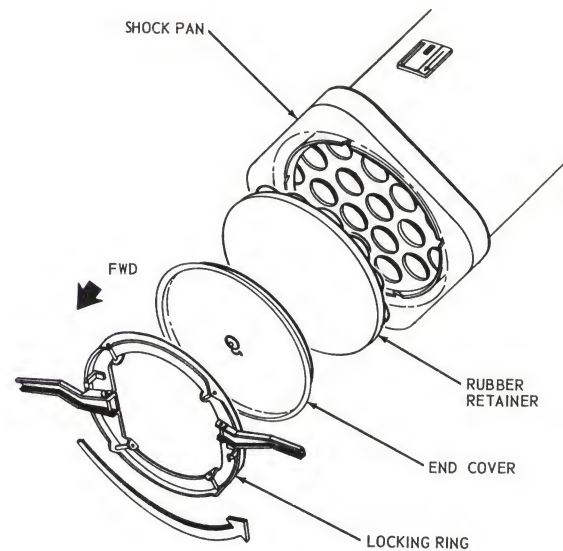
Locking Ring, Cover, and Rubber Retainer Removed.
